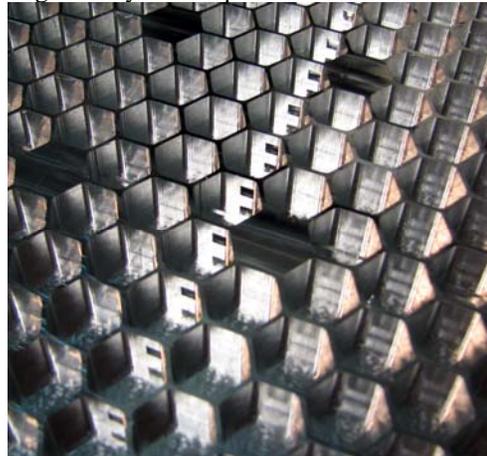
Detailed view of sandwich panel core illustrating wiring channel through ribs.
